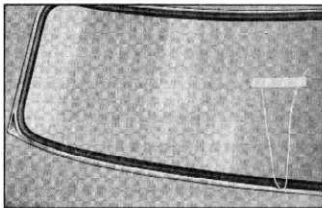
Cord in Pinch-Weld Cavity
